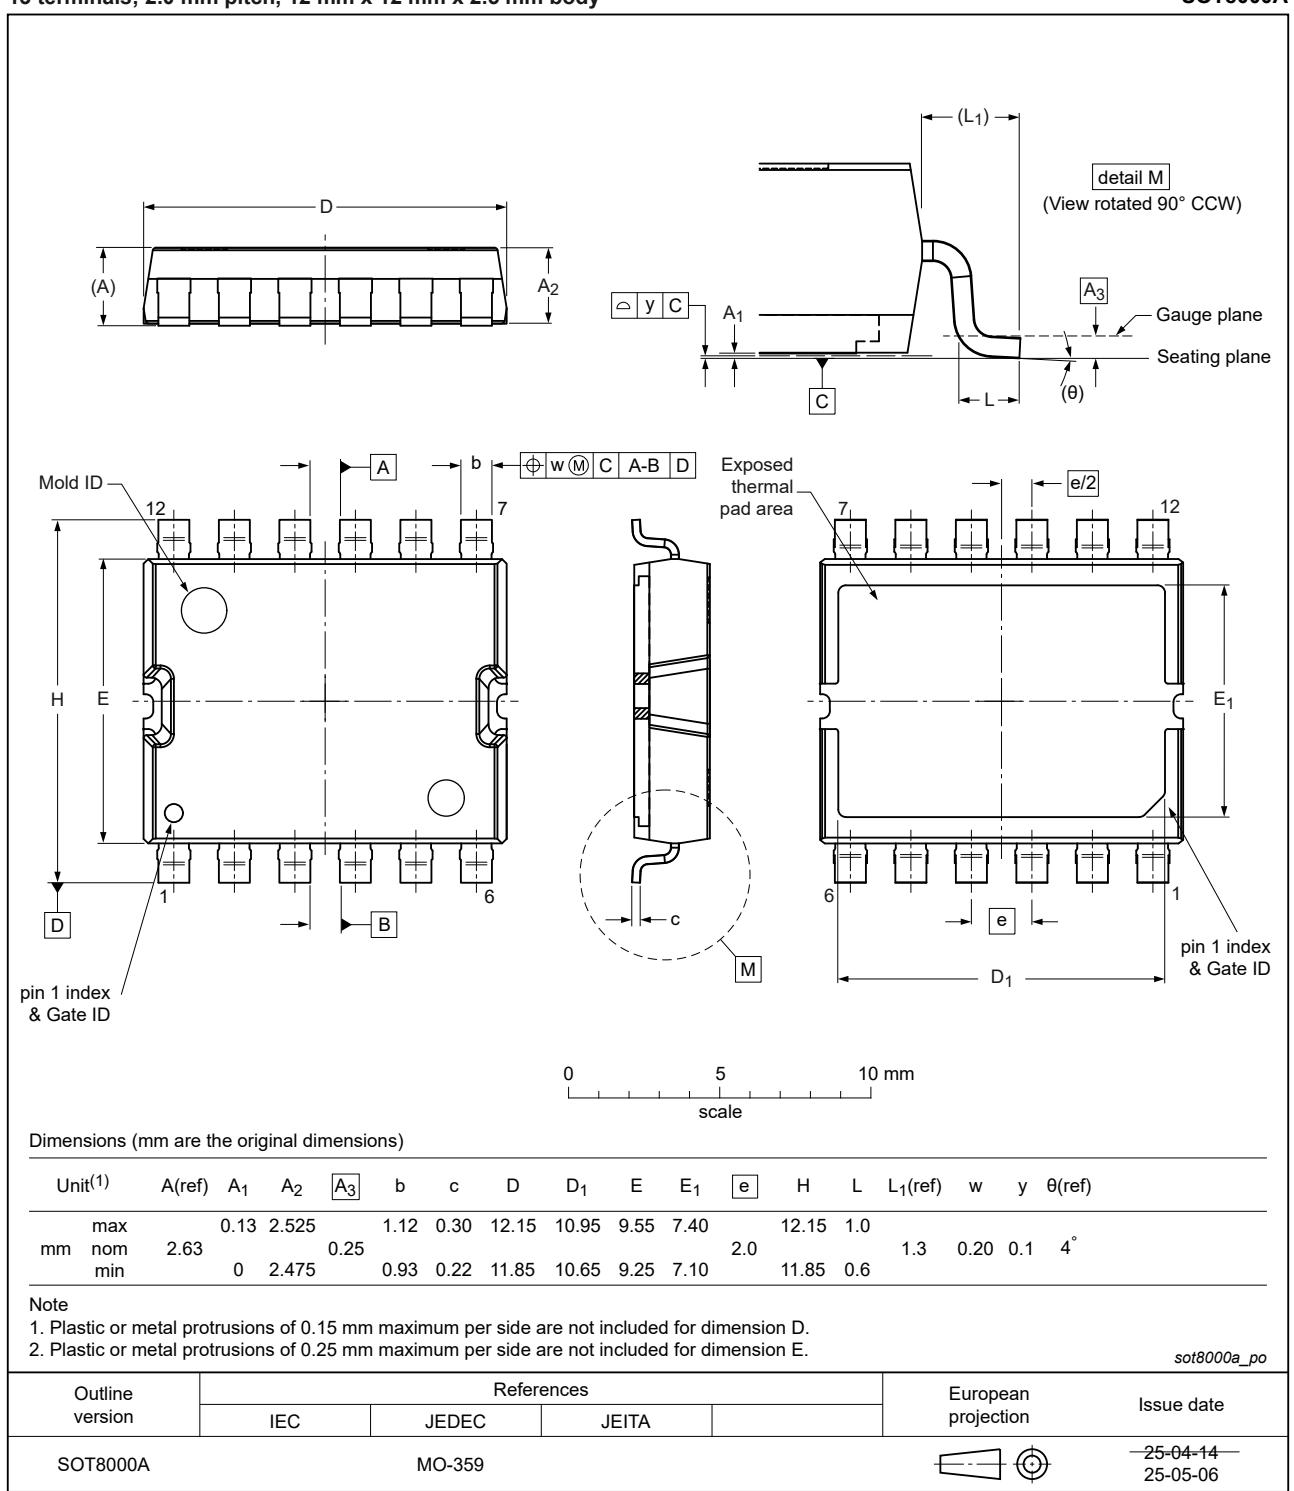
Package outline CCPAK1212 (SOT8000A)
